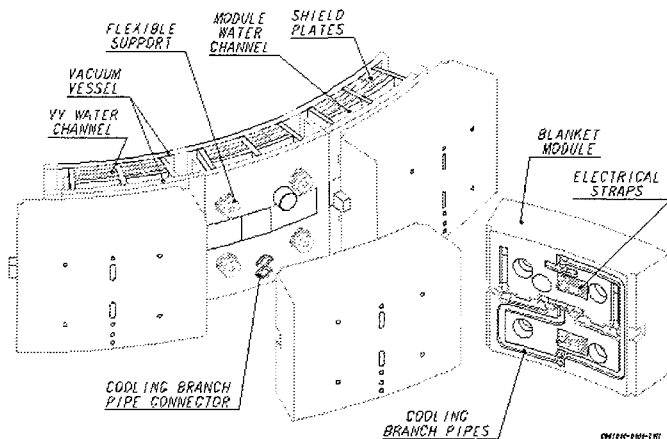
Blanket Module Attachment by Inter-modular Key (Type 2)
